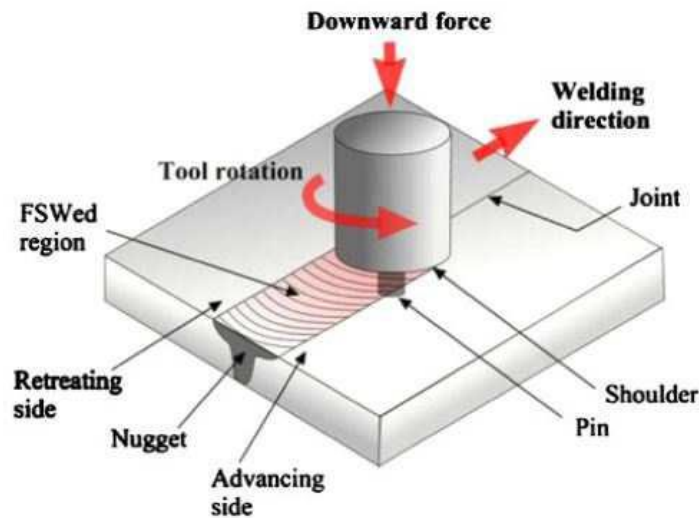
1 Schematic drawing shows the principle of friction stir welding process; *S. Malophery et al. (2016)*.
